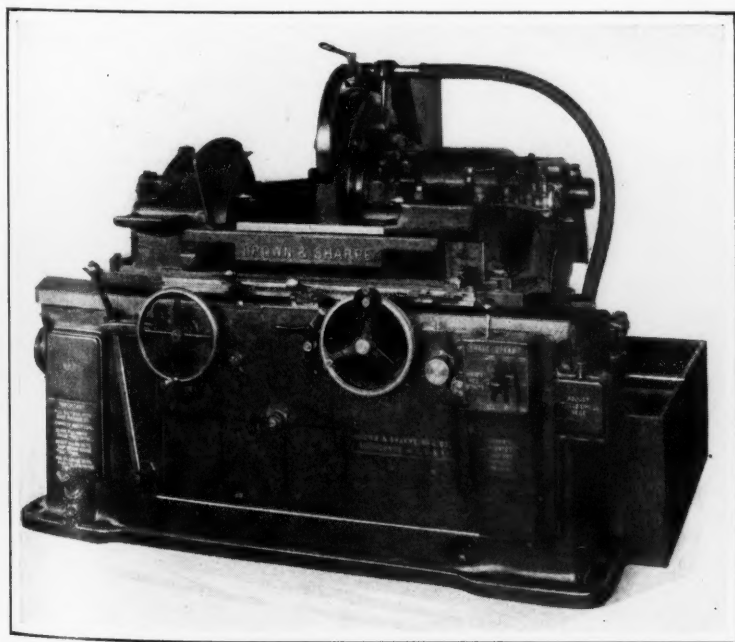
Brown & Sharpe Plain Grinding Machine with Narrow Wheel
